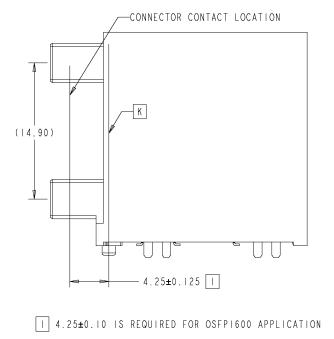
Stacked SMT connector, contact location, 14.9mm pitch
